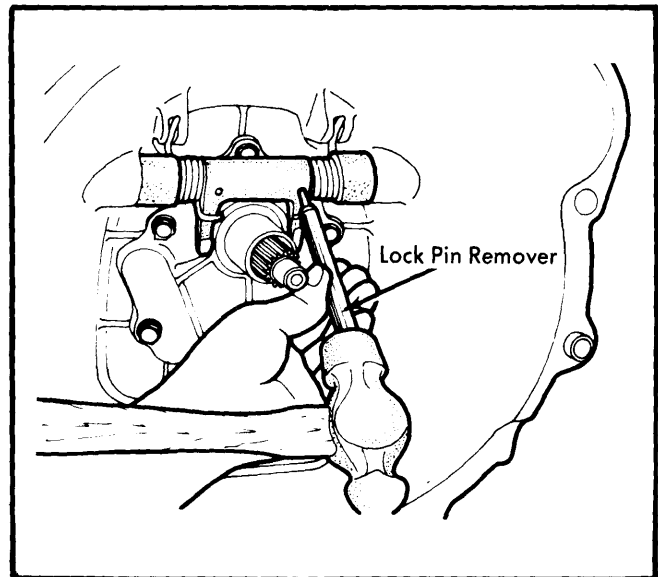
Using a  $\frac{3}{16}$ " Punch to Remove Shift Arm Spring Pin
